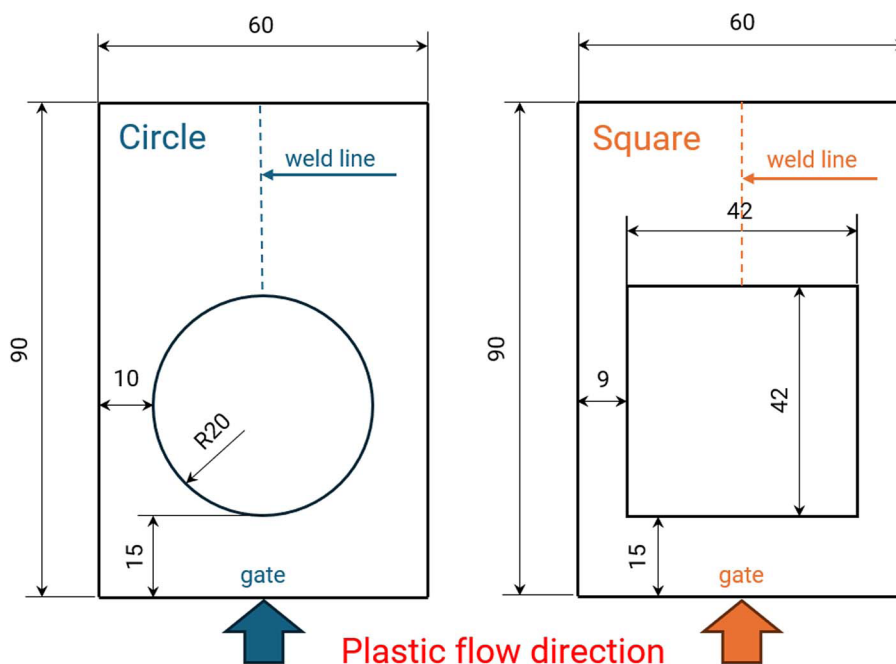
Dimensions of mould cavities, thickness of cavities is 3.1 mm
